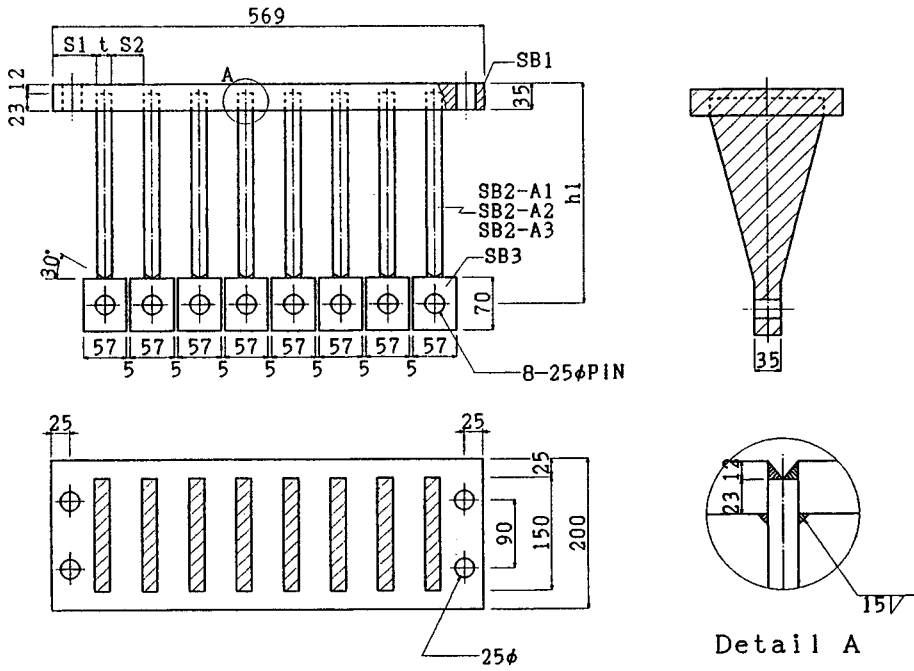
Details of steel welded TADAS device (units in mm)
